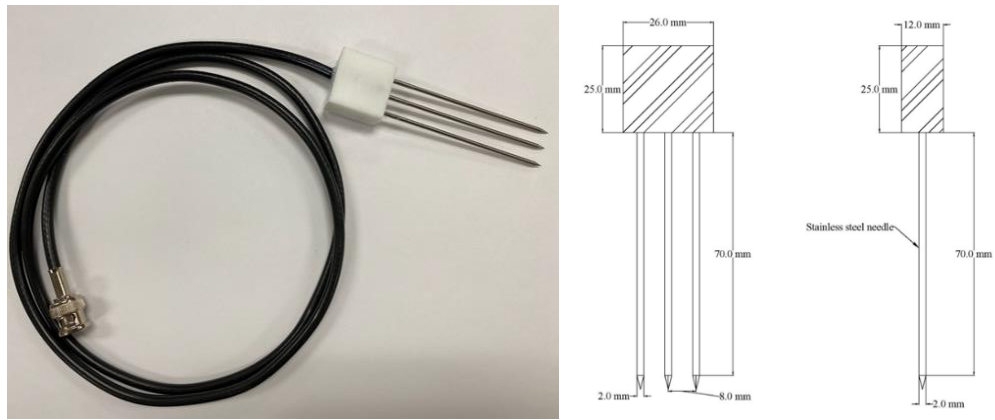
Complete assembly and schematic drawing of the TDR sensors.
